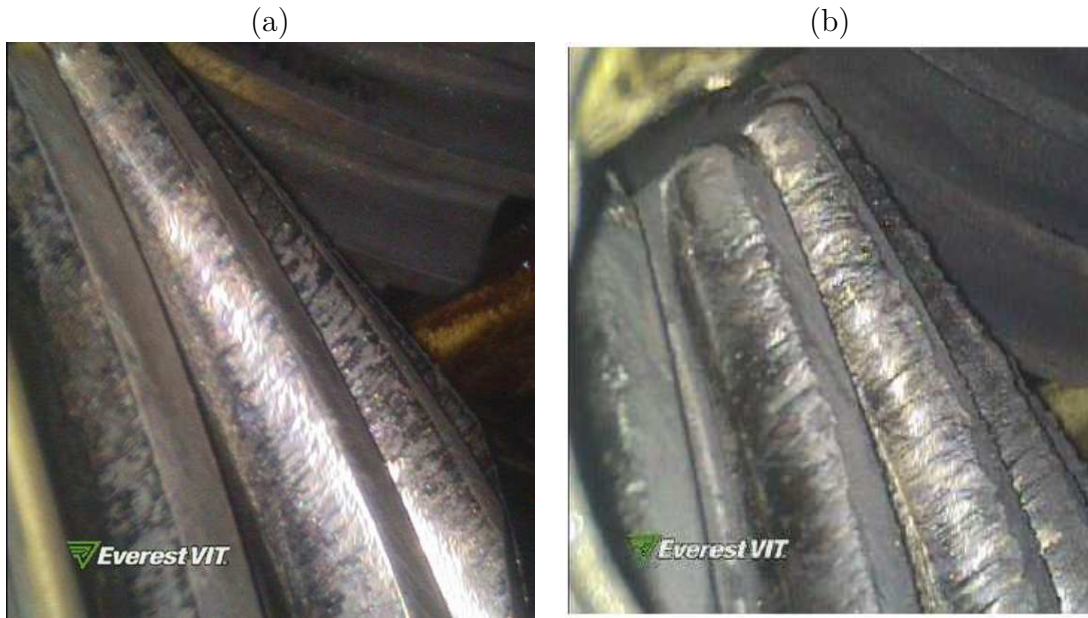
Borescope picture showing input gear teeth: (a) earlier stage of testing, and (b) after failure [62]
